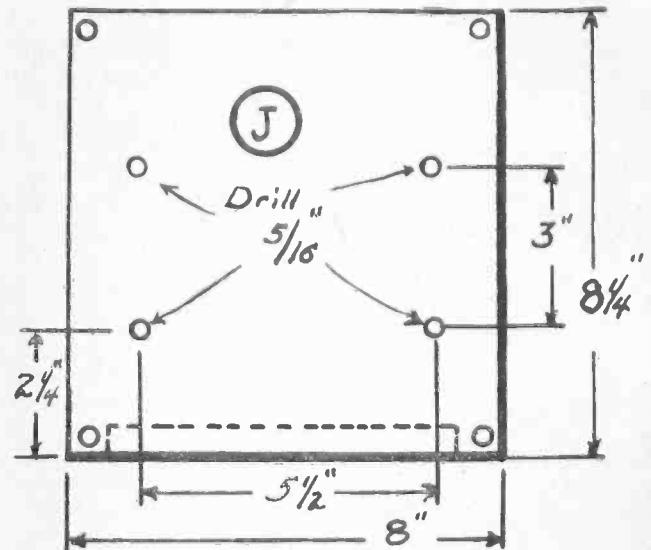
Back panel J which is same size as front panel. This can be made of hard wood although radion or hard rubber may be used. The corner holes correspond to those drilled on front panel.
